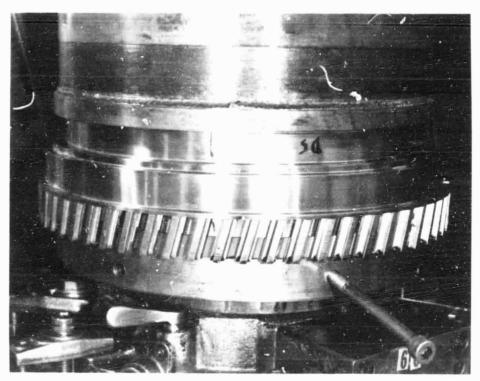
High-Pressure Compressor Eighth Stage Rotor Detail
